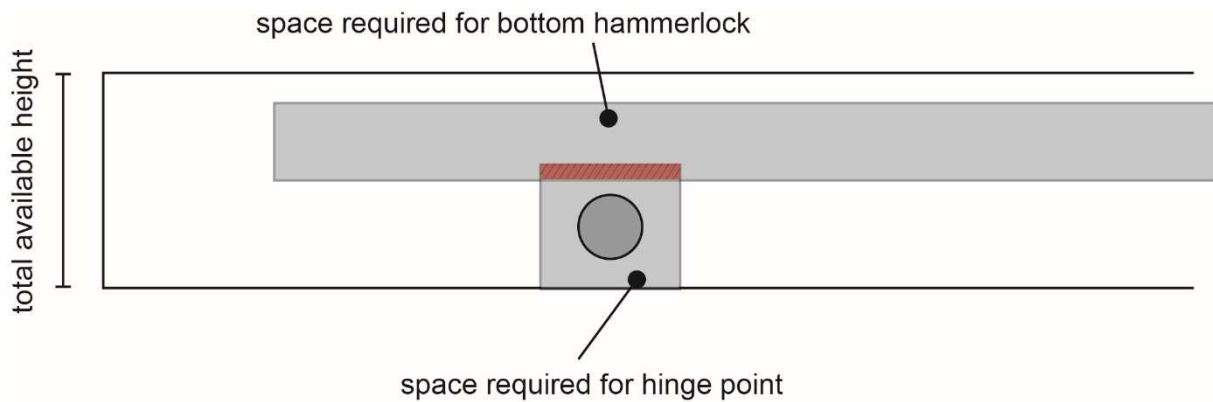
Detail of the 40ft basecorner design, showing the bottom hammerlock and the hinge point.
